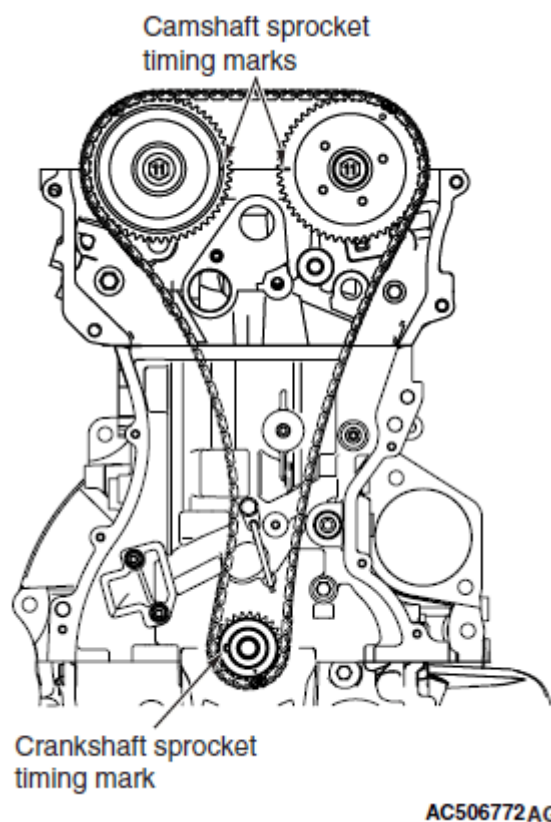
Identifying Camshaft Sprocket Timing Marks And Crankshaft Sprocket Timing Mark
